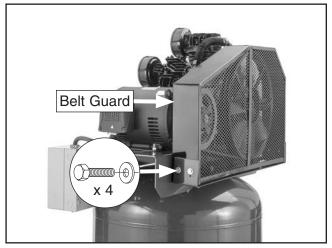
Location of belt guard and fasteners (Model G0943 shown).
